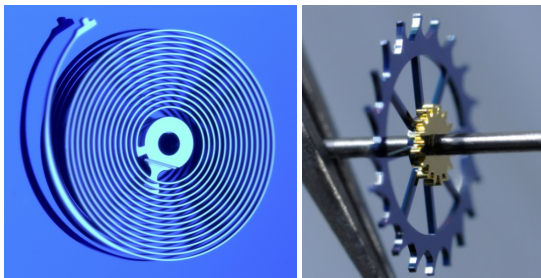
Silicon hairspring spiral-plate component (left), and right, a Silicon wheel with metal pinion on an axis assembled by press fitting.
